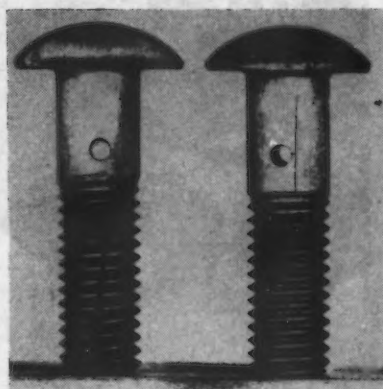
The bolt on the left shows a quenching crack in the threaded portion. The bolt on the right has a seam which may often be mistaken for a quenching crack.
